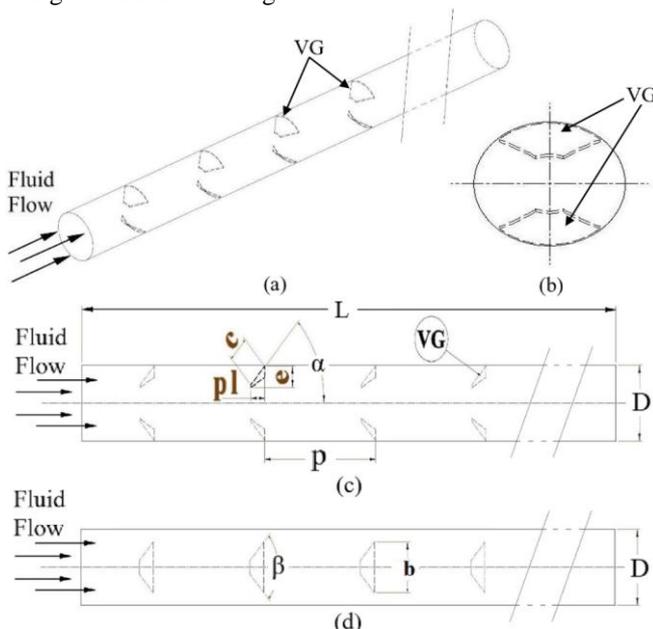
Schematic Model of a tube with vortex generator (a) isometric view, (b) front view,
